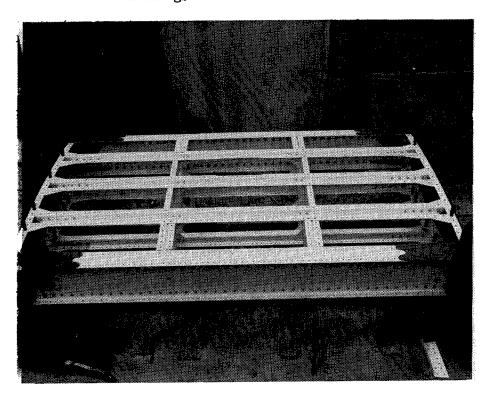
Wing Box Assembly Prior to Fitting of the Skin.
